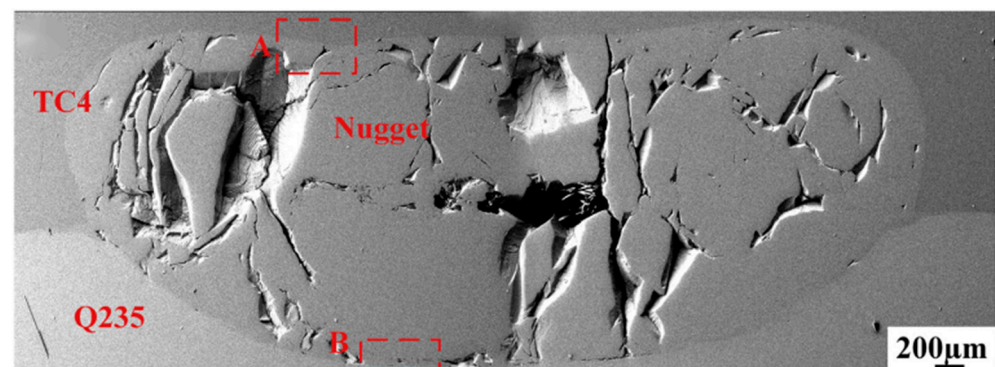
Morphology of TC4/Q235 spot welding joint—Reprinted from Ref. [63].
